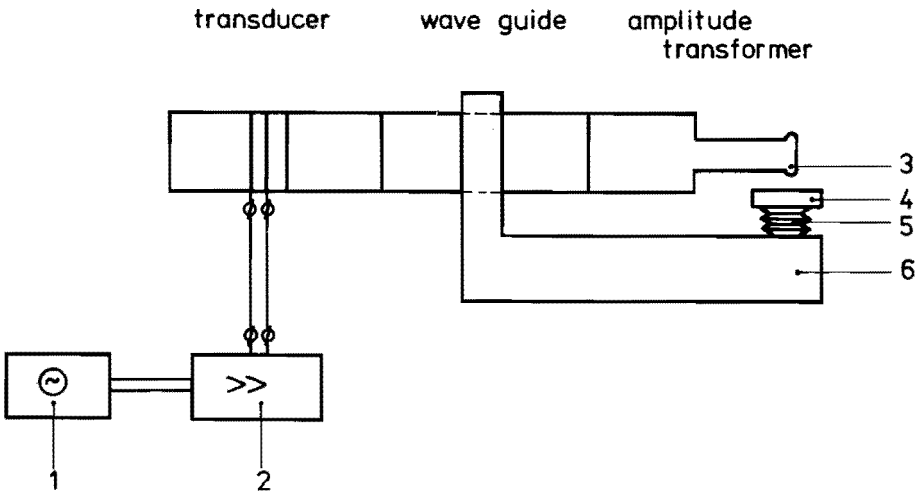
Ultrasonic metal welding equipment, including
